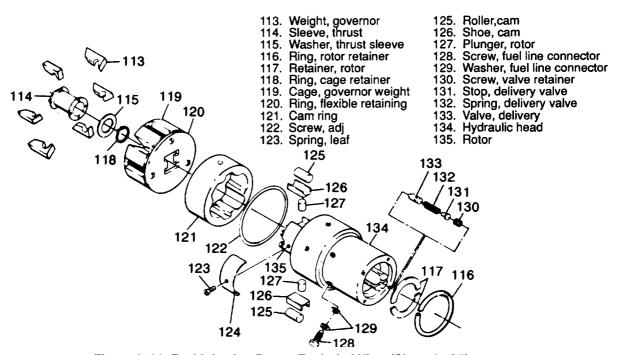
Fuel Injection Pump, Exploded View (Sheet 6 of 7)
